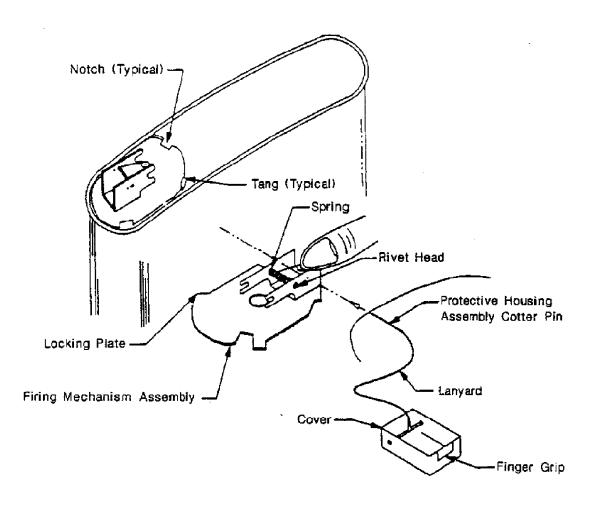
Detail of Training Canister Firing Mechanism Assembly
